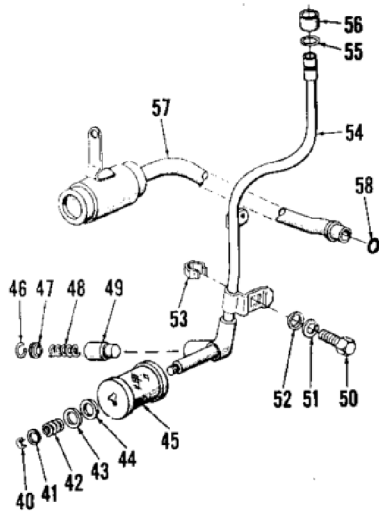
Exploded view of suction and return line hydraulic fluid filters for models 2000, 3000 and 4000. System back-pressure valve is (49).
